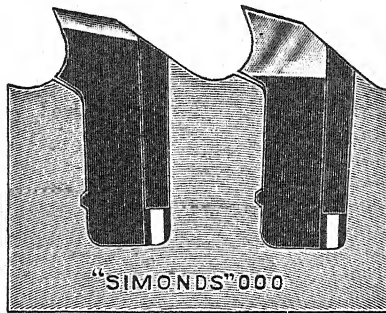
The Simonds Inserted Blade of High-Speed Steel for Circular Saws, Made in Six Sizes.
